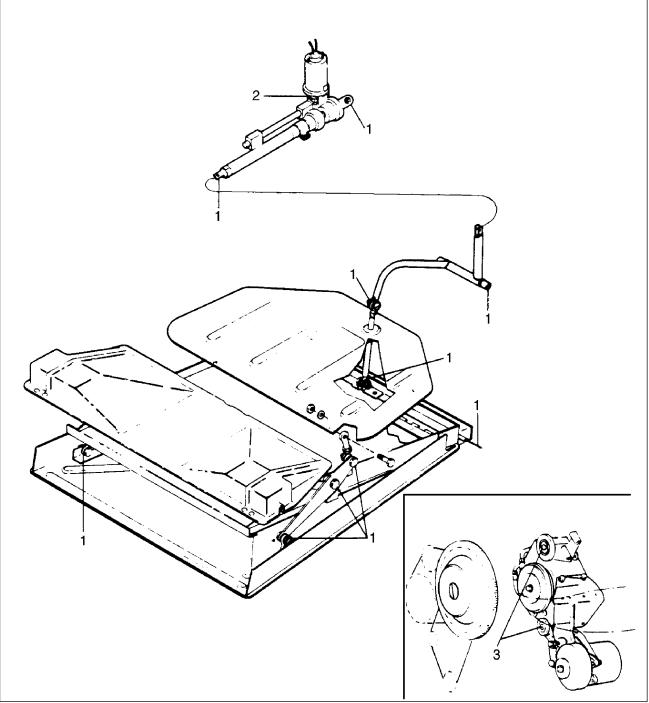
Lubrication Chart (Optional Air Conditioning Condenser and Compressor) PA-161, S/N's 7716002 thru 28-8616057 and 2816001 thru 2816109
